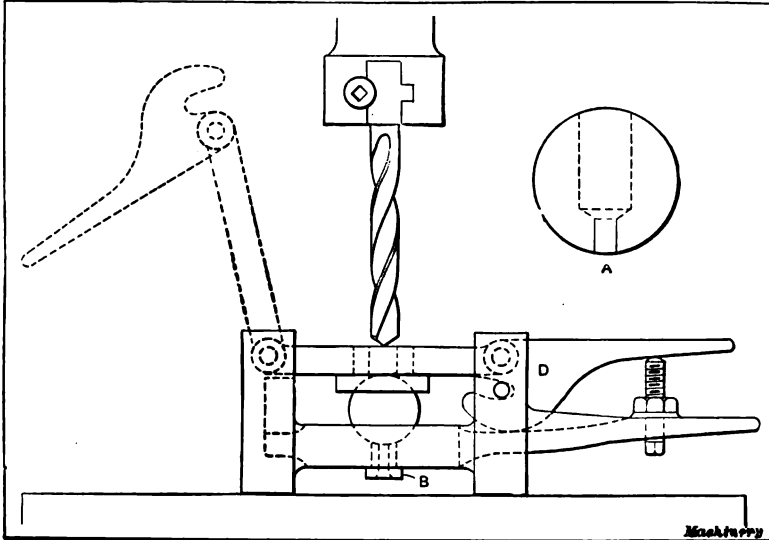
Box Jig for Drilling Ball shown enlarged at A
